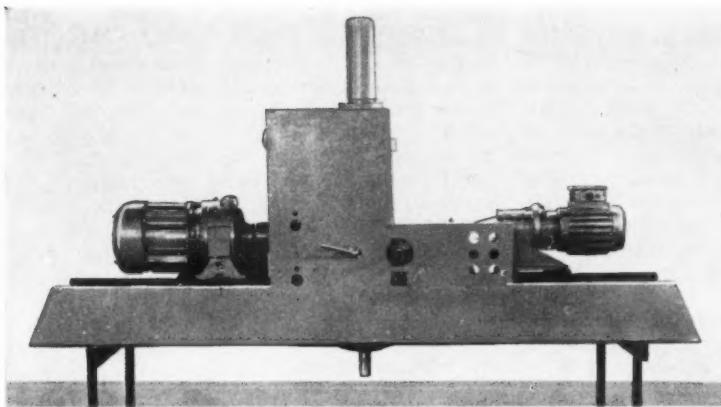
A General View of the Head of the Machine, from the Front. The Drilling Quill Moves in Thomson Ball Bushes
